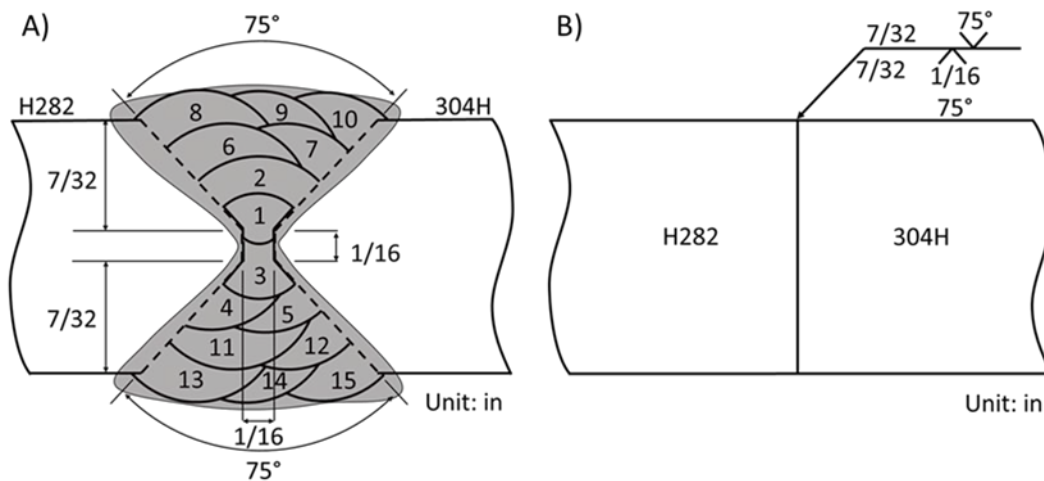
Dissimilar weld (DSW) GTAW geometry (a) details of the double-V groove pass sequence, and (b) weld symbol
